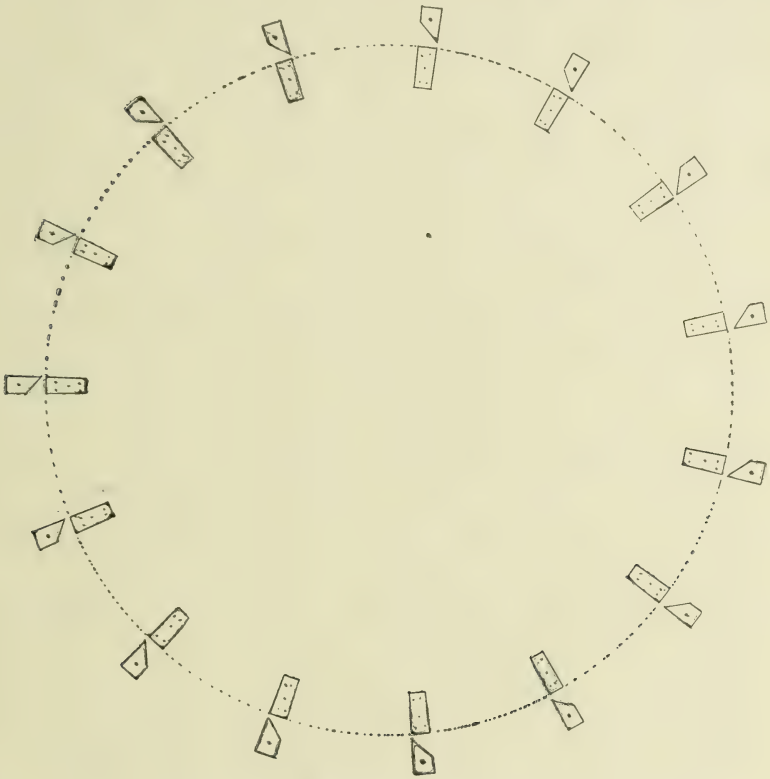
, METHOD OF LAYING OUT BLOCKS FOR MAKING HOOPS
